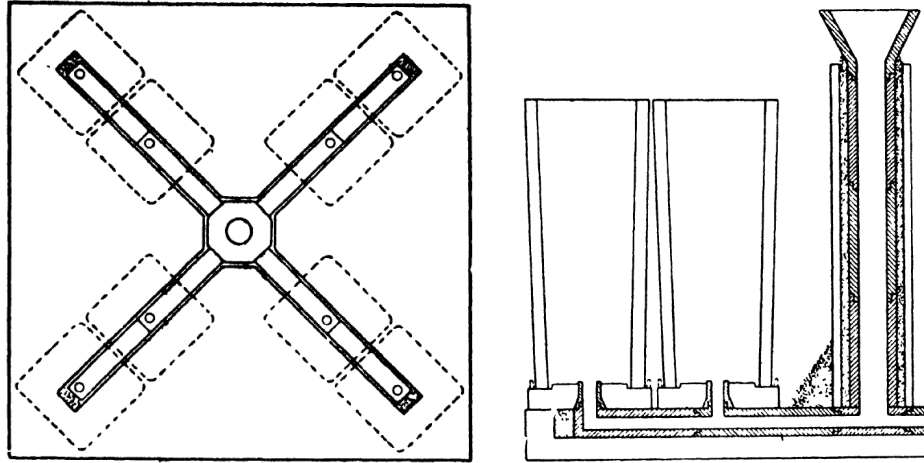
Schematics of teeming through bottom pouring: top view of single trumpet feeding four runners (left) and side view of trumpet and one runner feeding two molds (right). (Reprinted from: Lister, W. Practical steelmaking. Chapman & Hall; 1929.)
